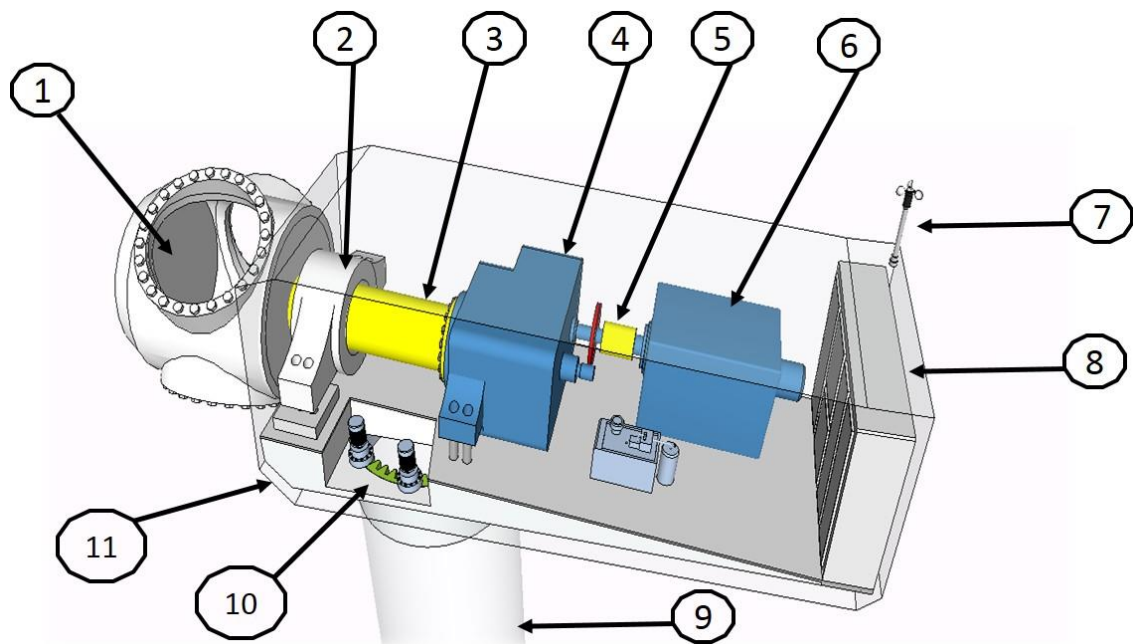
Wind Turbine Design (Courtesy: Valemo) Structure of a modern wind turbine, showing major components: (1) Hub or Rotors; (2) main bearing; (3) low speed shaft; (4) gearbox; (5) high speed shaft (6) generator; (7) measuring mast (8) transformer (9) tower (10) yaw motor
